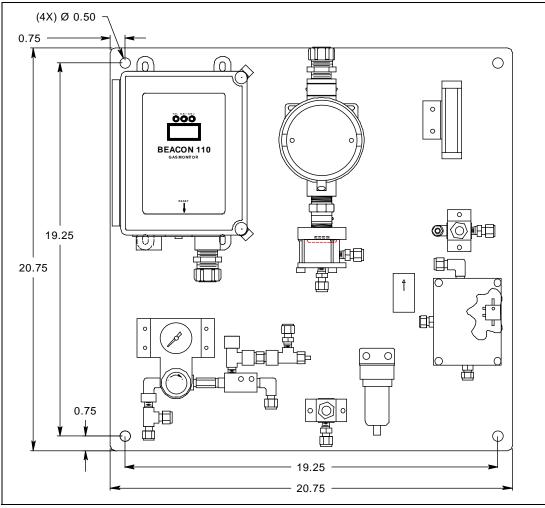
30-0954-265-01 Outline & Mounting Dimensions
